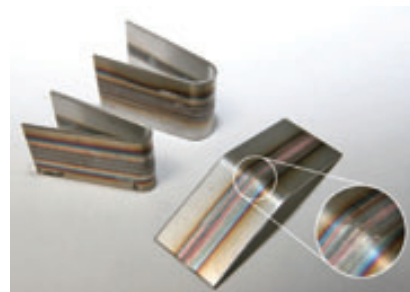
Typical MSS ASTM E190 guided bend-test weld ductility specimens. From left: cooling-controlled processing 2t bend radius – full bend; cooling-controlled 4t bend radius – full bend; conventional as-welded 4t bend radius – failure
